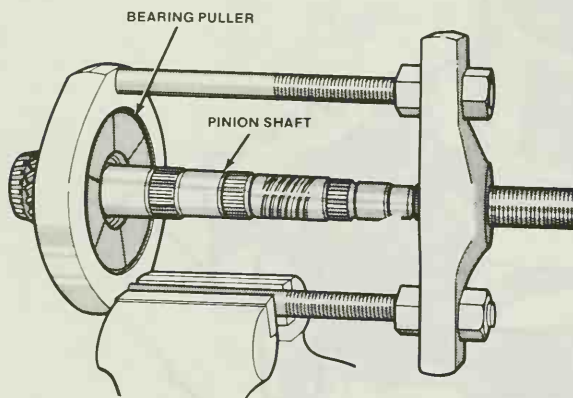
Pinion bearings are removed with a bearing puller. (Chrysler Corporation)
